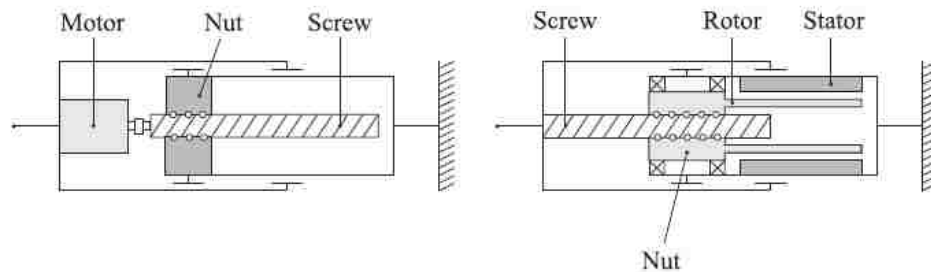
Ball screw mechanism: rotating screw (left), rotating nut (right) [9]
